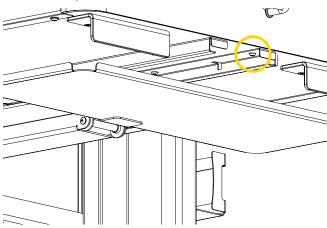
Tightening the screws on the right-hand side of the 2-part sliding mechanism (2 of 2)
